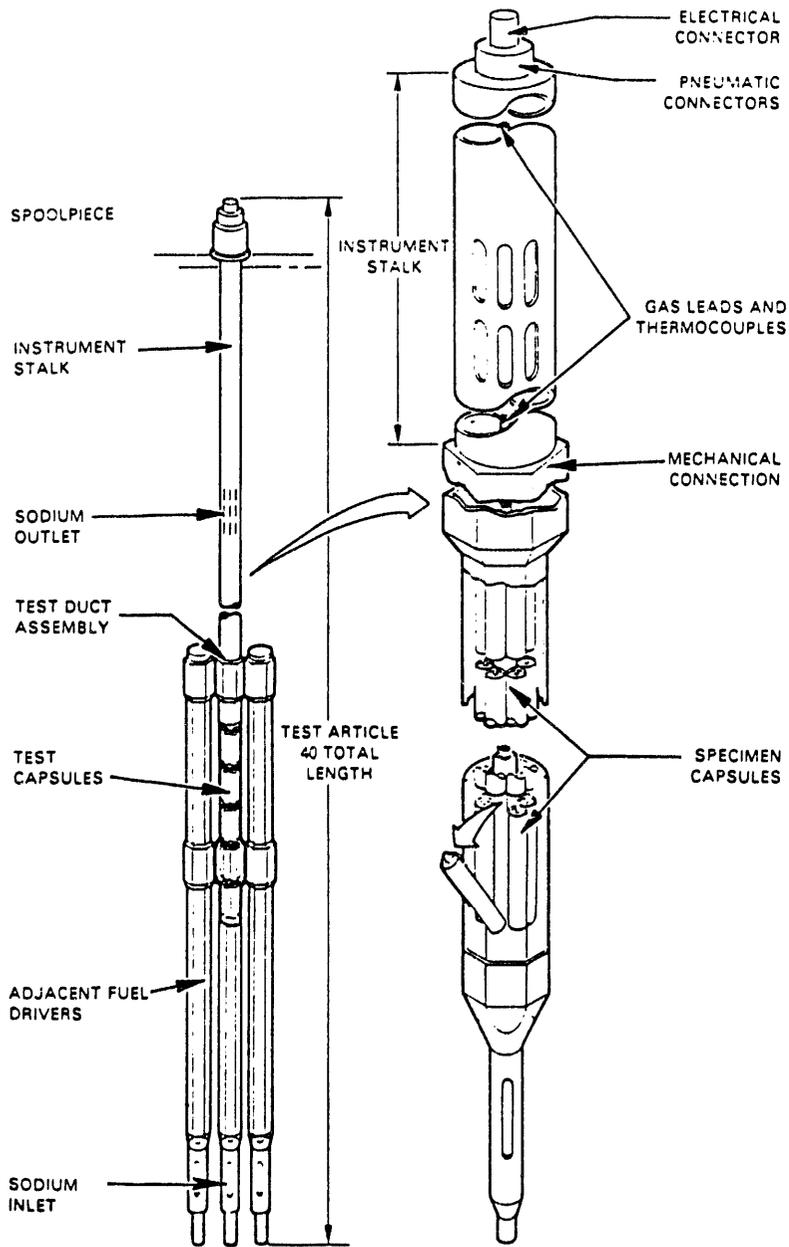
Materials Open Test Assembly (MTOA) of the FFTF
